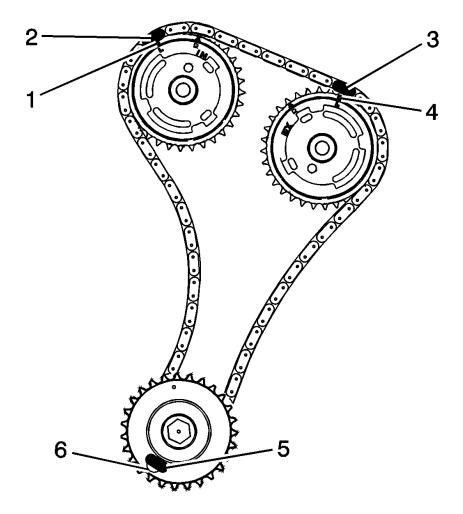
Locating Left Secondary Camshaft Drive Chain Timing Marks Courtesy of GENERAL MOTORS COMPANY
